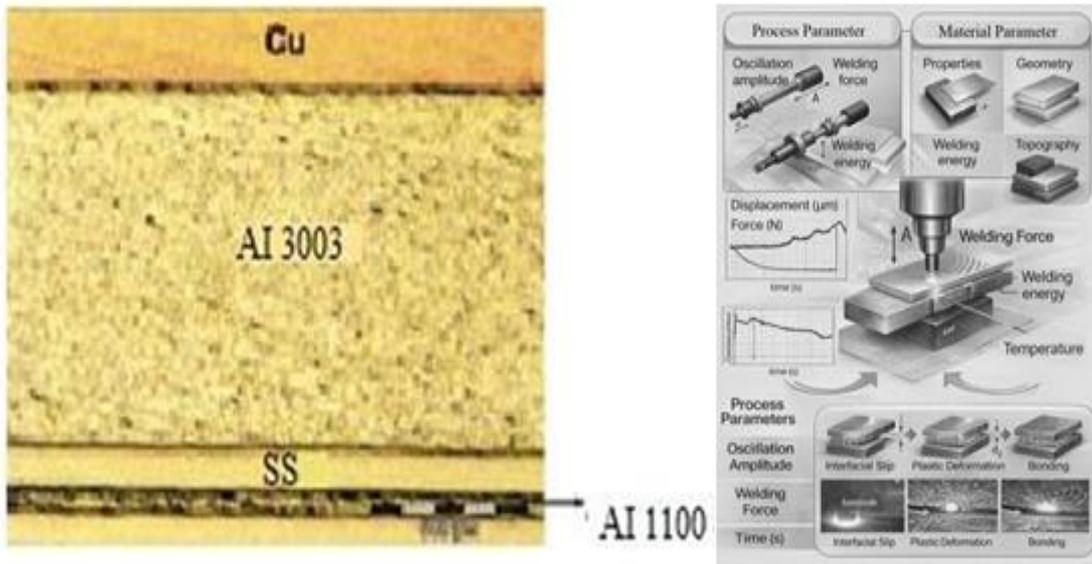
Theoretical Microstructure of the FGM Figure-2: fundamental elements in ultrasonic metal welding In this paper, the possibility of ultrasonic welding in hybrid material systems, including ceramic, glass, aluminum alloys, glass fiber reinforced plastic (GFRP), and carbon fiber reinforced plastic (CFRP), has been proven by the author. The welding time took less than 1 second for metals, glass, and ceramic material and under 4 seconds for composite materials. The tensile strengths of up to 50 MPa were measured by the authors, confirming the ultrasonic welding capability in making sound joints for both metallic and non-metallic materials [4].
